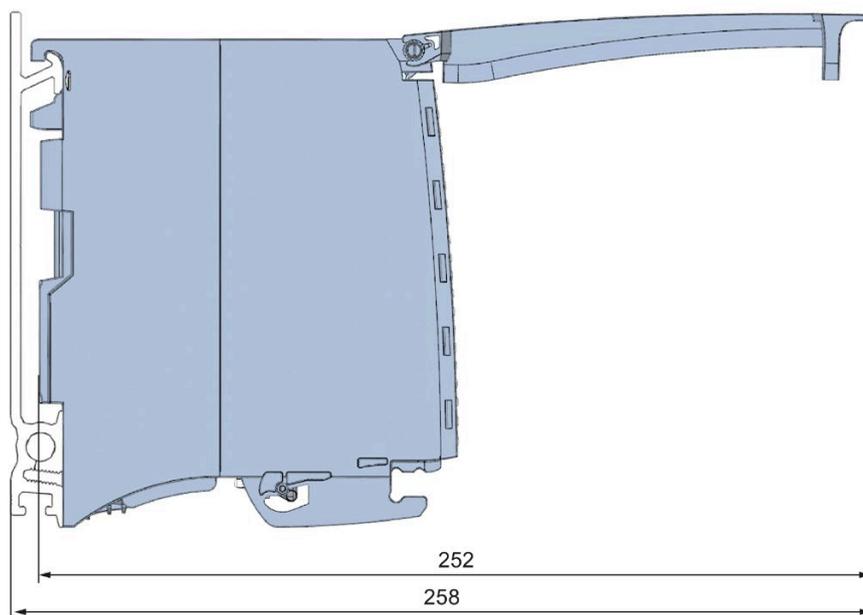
Dimensional drawing of the DI 16x24VDC HF module, side view with open front cover
